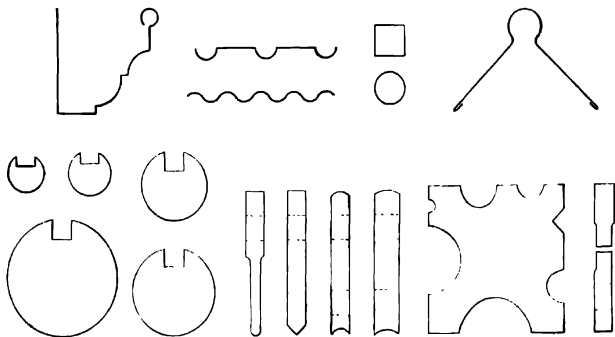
Standard sets of dies for gutter-bending machine and examples of work done
